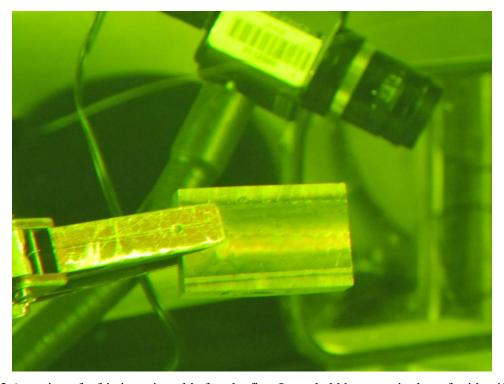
A section of a friction stir weld after the first 5 cuts held by a manipulator for identification
